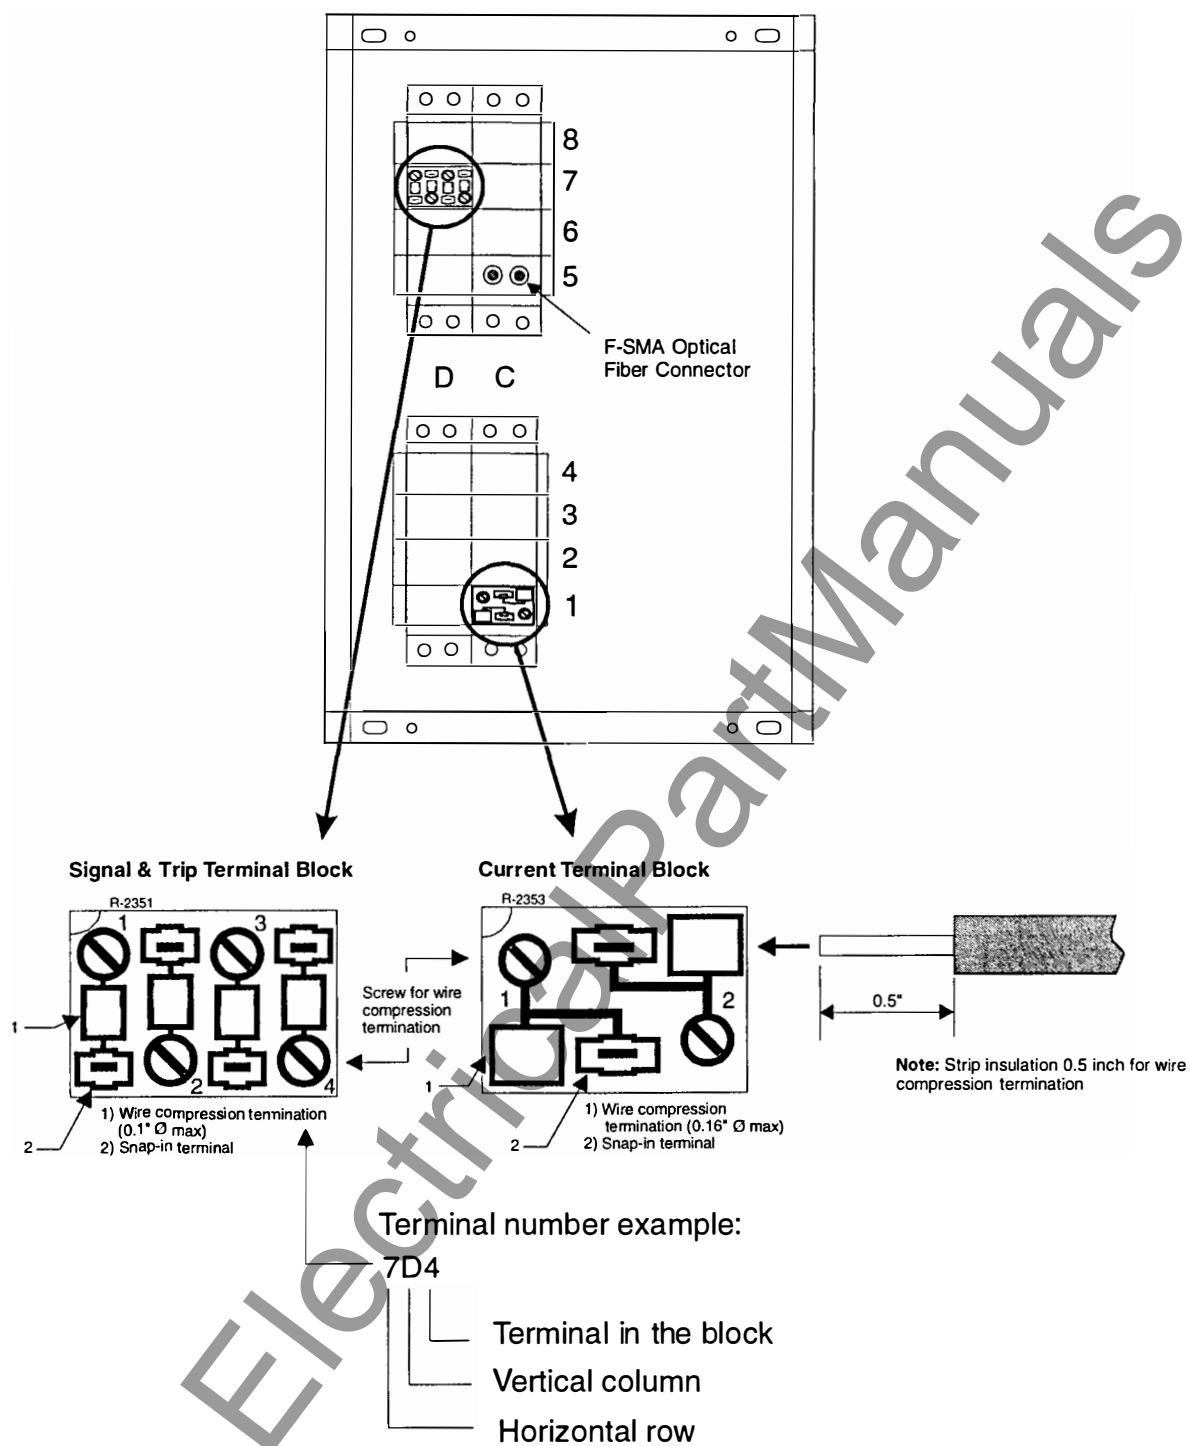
Terminal Block Detail on the Rear Panel - Wire Compression
